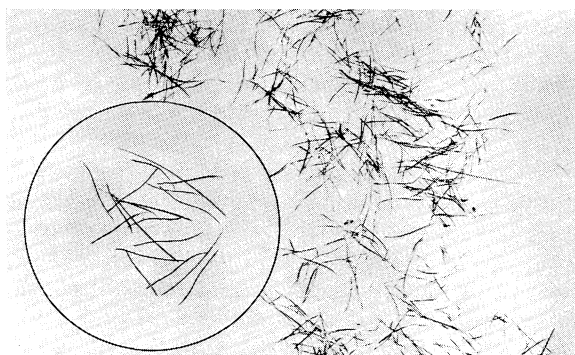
Fine hair-like curled chips produced by rotary gear shaving.
